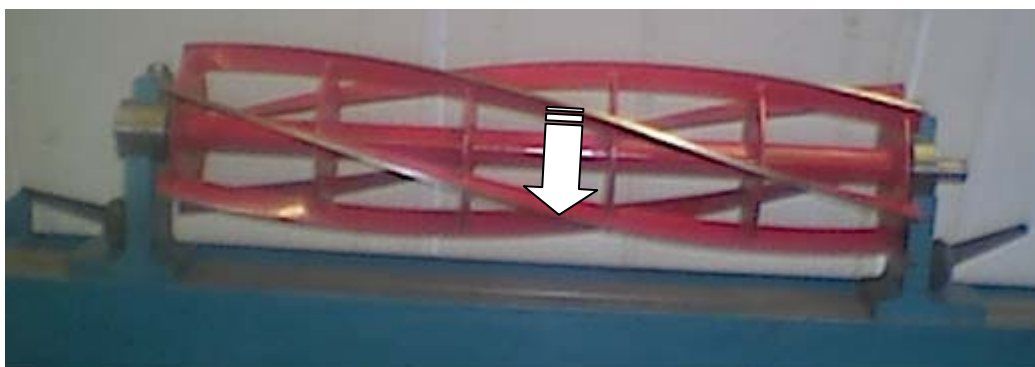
Direction of cylinder rotation viewed from the front of the grinding machine
